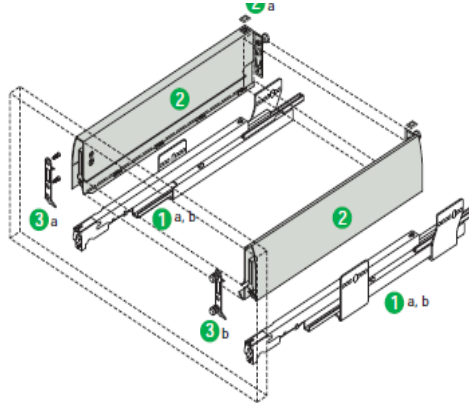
TYPICAL DRAWER SLIDES DETAILS
